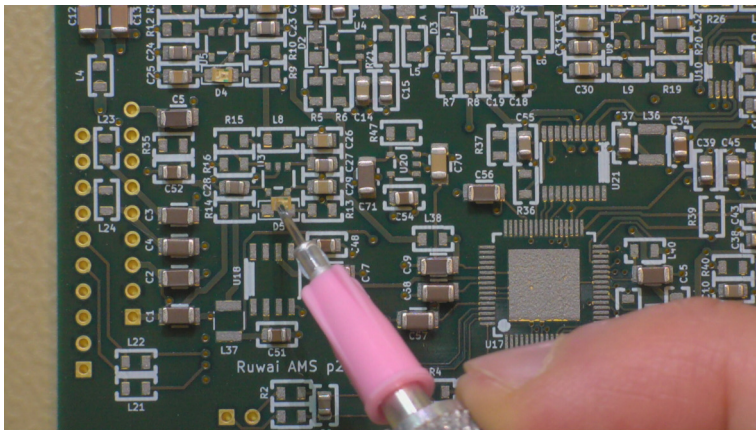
Example of the placement of a LED in 0805 package using the vacuum pickup tool.
